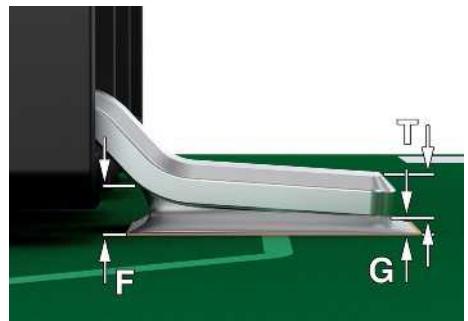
Flat gullwing connections, minimum height of the soldering spot at the heel (F)
